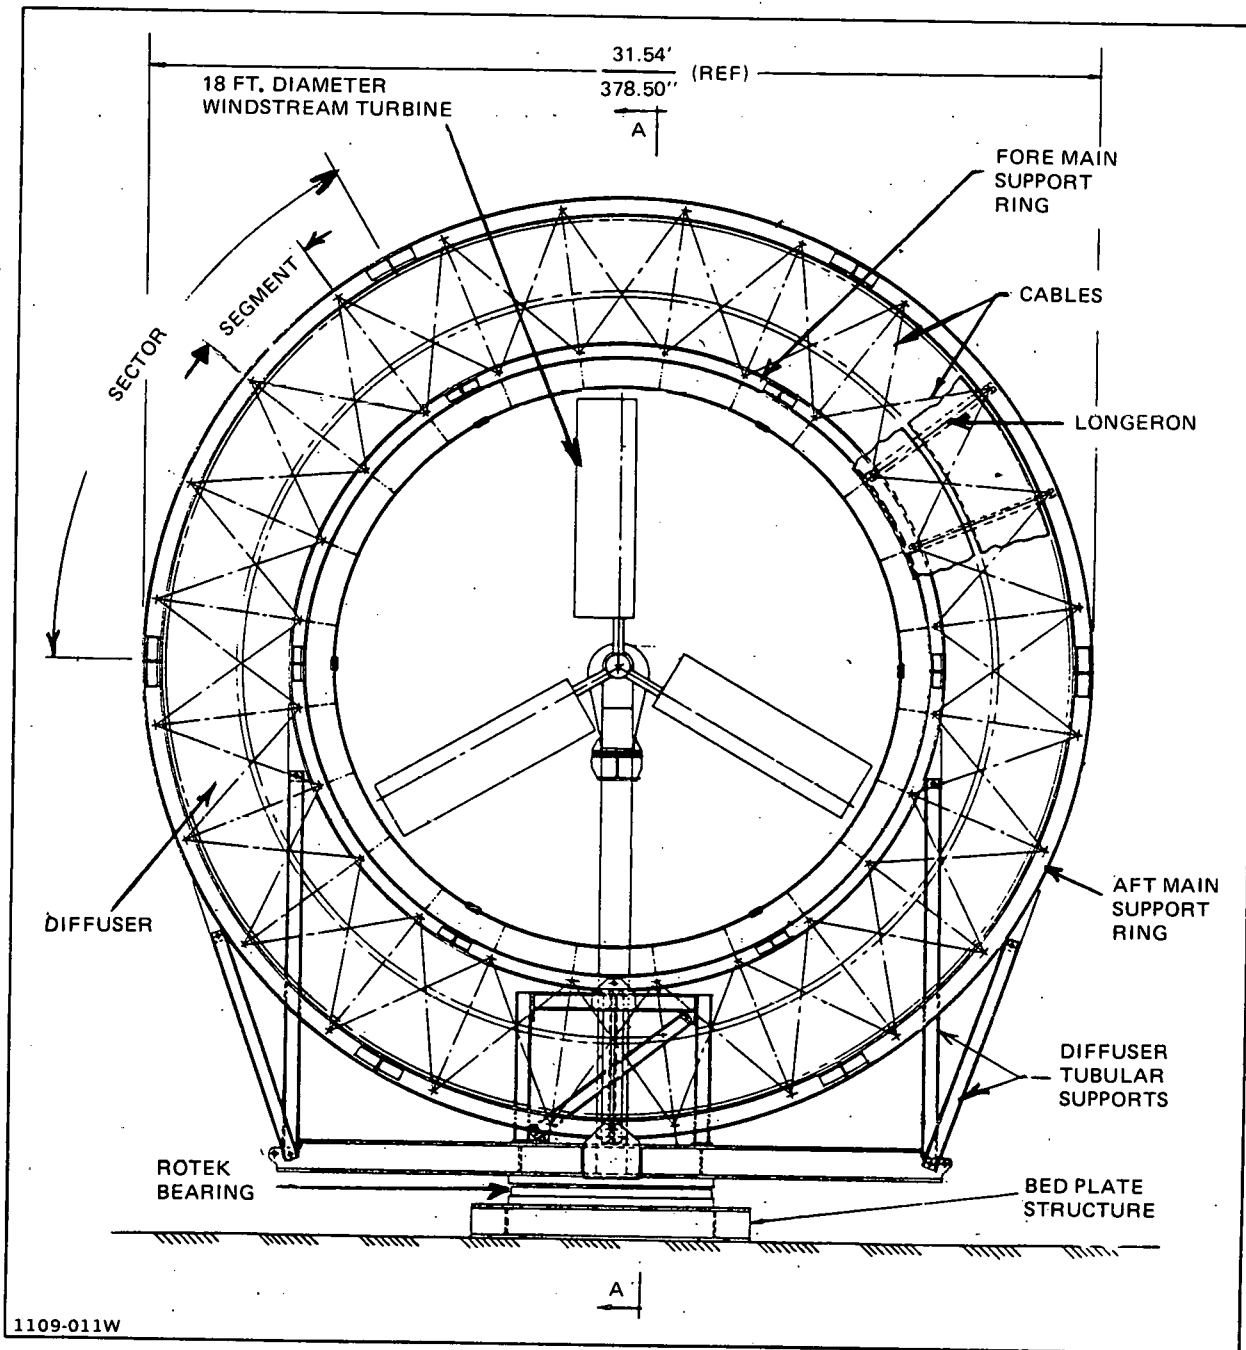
Engineering Design of DAWT Field Test Article – View Looking Forward (Upwind)
